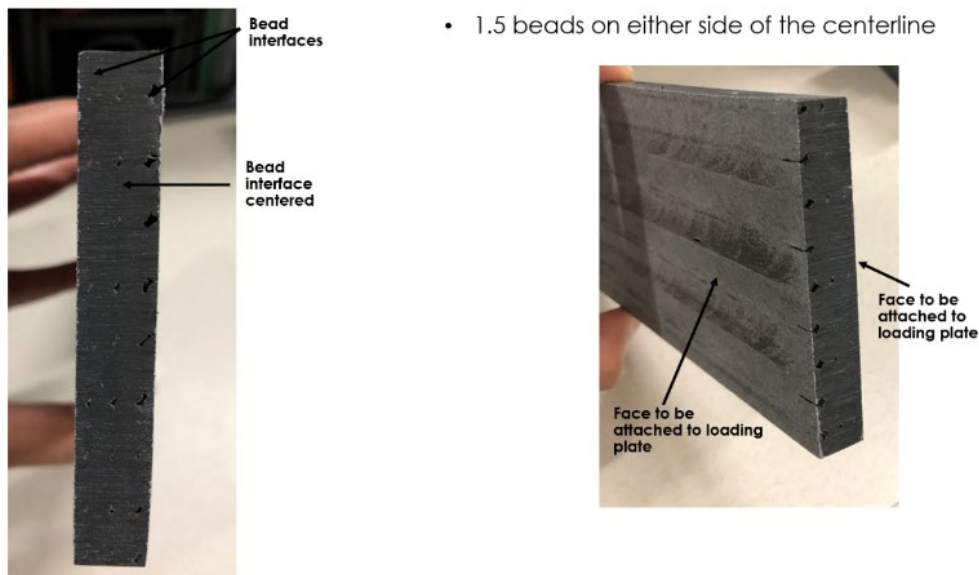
Cross sectional view of the test coupon indicating bead interfaces.
